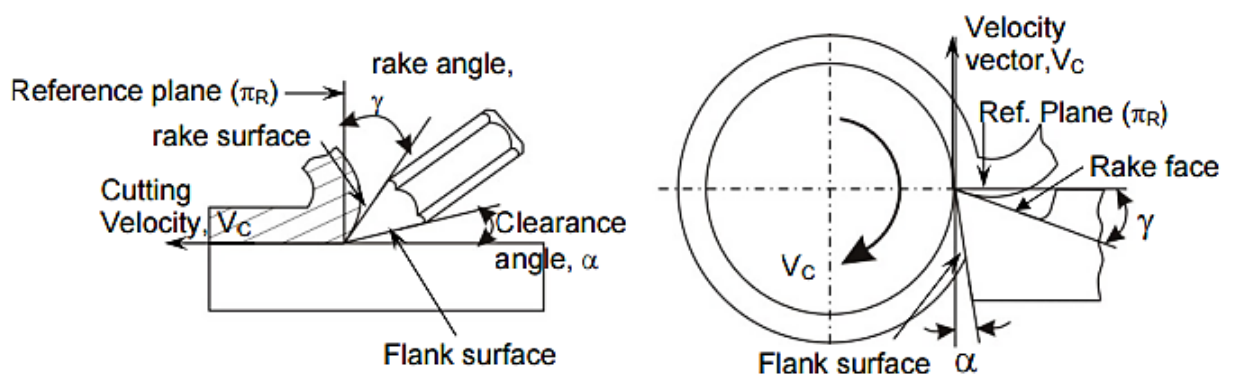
Rake and clearance angle of cutting tools (www.doubtpoint.com)
